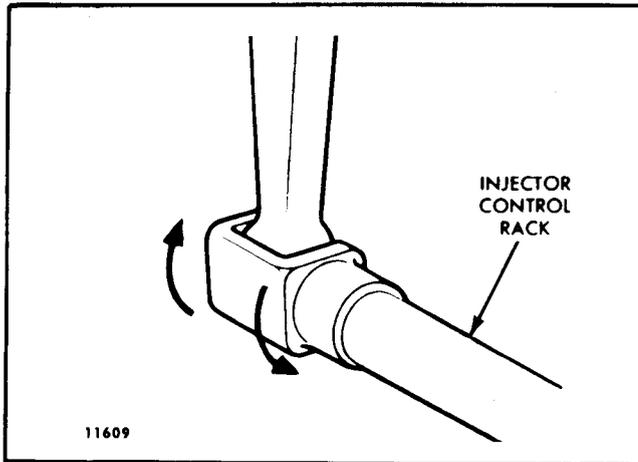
Checking Rotating Movement of Injector Control Rack
